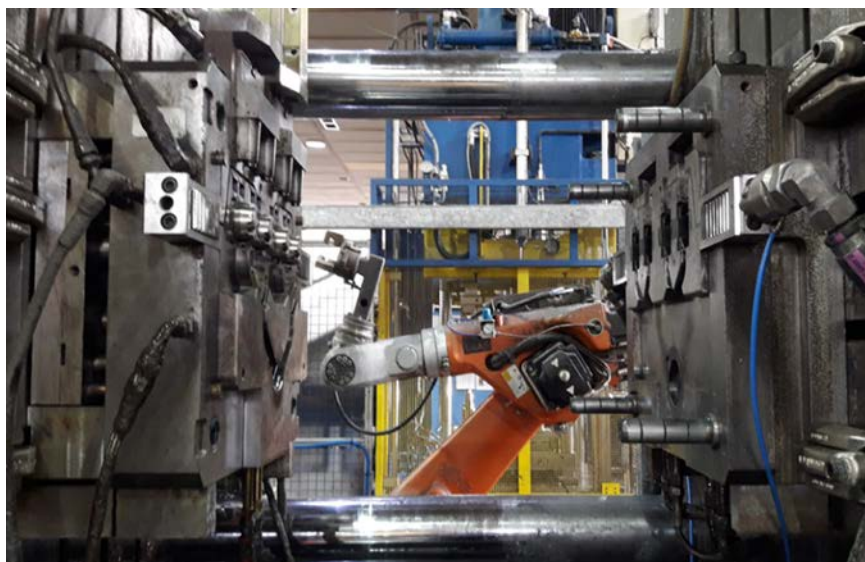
Casting mold equipped in cores with conformal thermostating system, assembled on casting machine Frech K510
